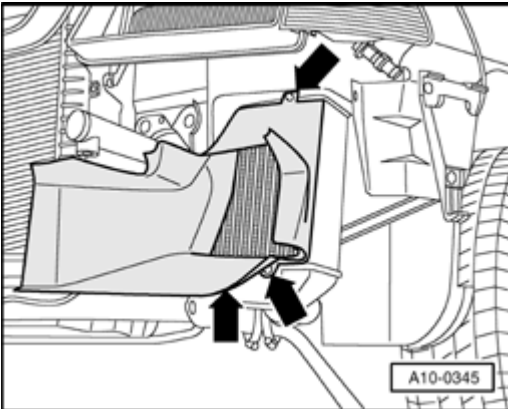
Removing Air Duct In Front Of Charge Air Cooler
